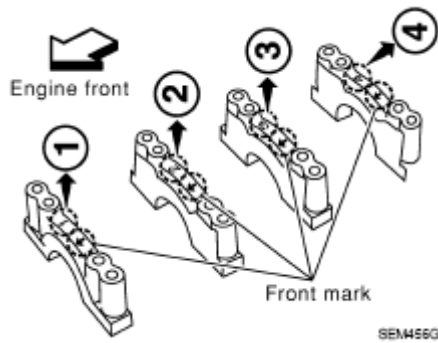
Identifying Bearing Cap Identification Mark Cast
